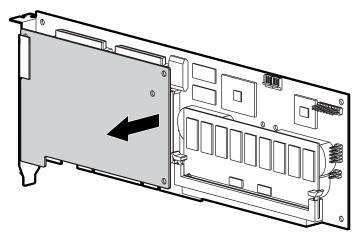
Unplugging the 2- to 4-channel adapter board
